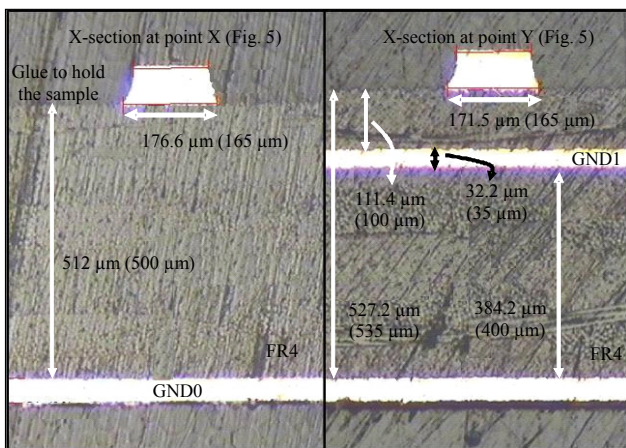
Cross-section showing manufactured substrate dimensions of test PCB at point X and Y in Fig. 5. The target dimensions are shown in parentheses.
